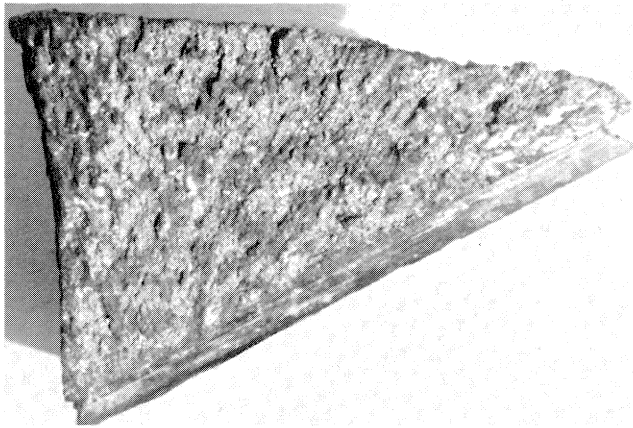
Photograph of Primary Fracture Side of Turbine Disk Fragment. The Machined Surface at Bottom of Figure is Bottom of Rim Slot. The Balance of the Inlet Face of Disk Is at Left. Disk Steeple Has Been Cut Off as Shown in Figure 14.
